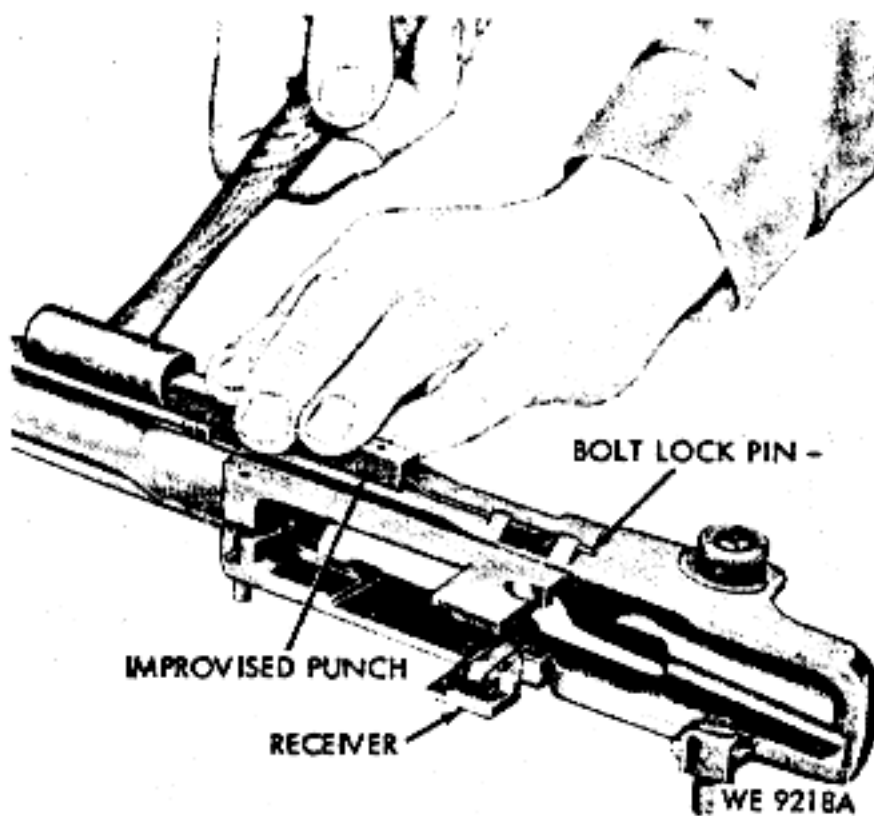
Removing retaining pin from bolt lock using improvised bolt lock retaining pin punch.
